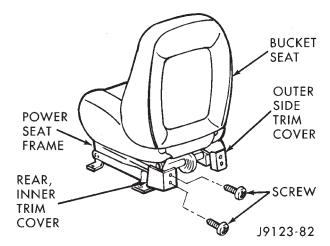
Power Bucket Seat Rear, Inner Trim Cover
